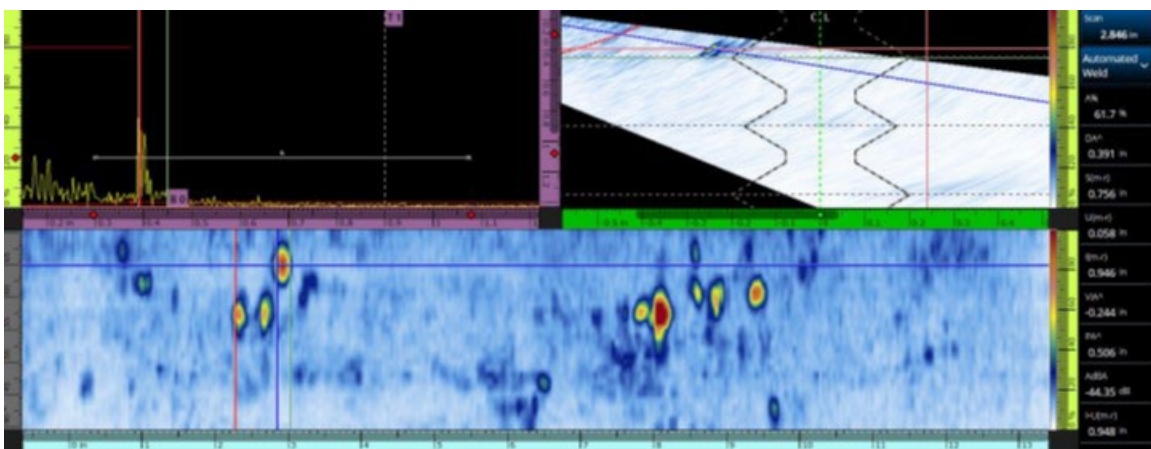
PAUT indication of defect at Location A in fillet weld test panel MGL-9 from ID-raster scan
